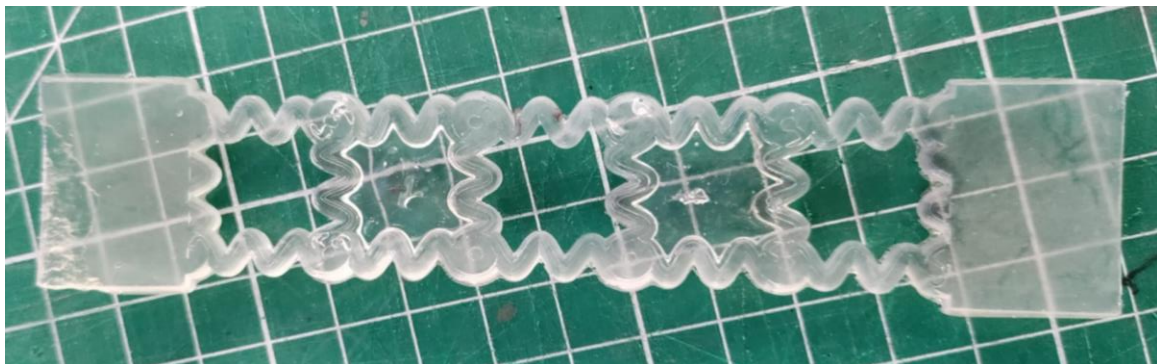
example of a test strip with several areas that are filled in by the 3D printer.
